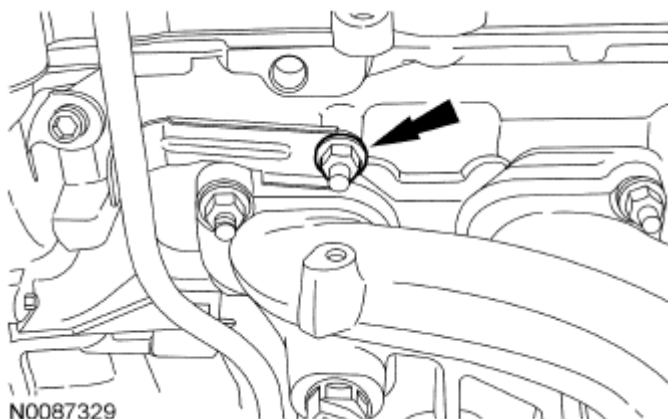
Locating Stud Bolt And Oil Level Indicator With Tube
